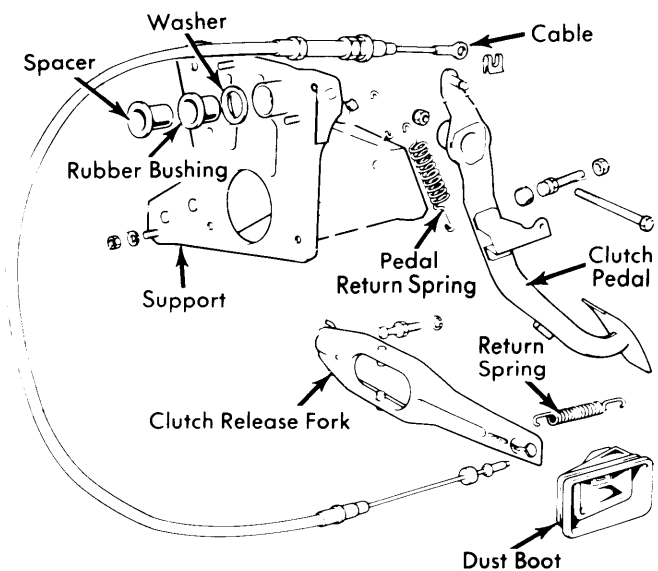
Exploded View of Clutch Cable & Pedal Components
